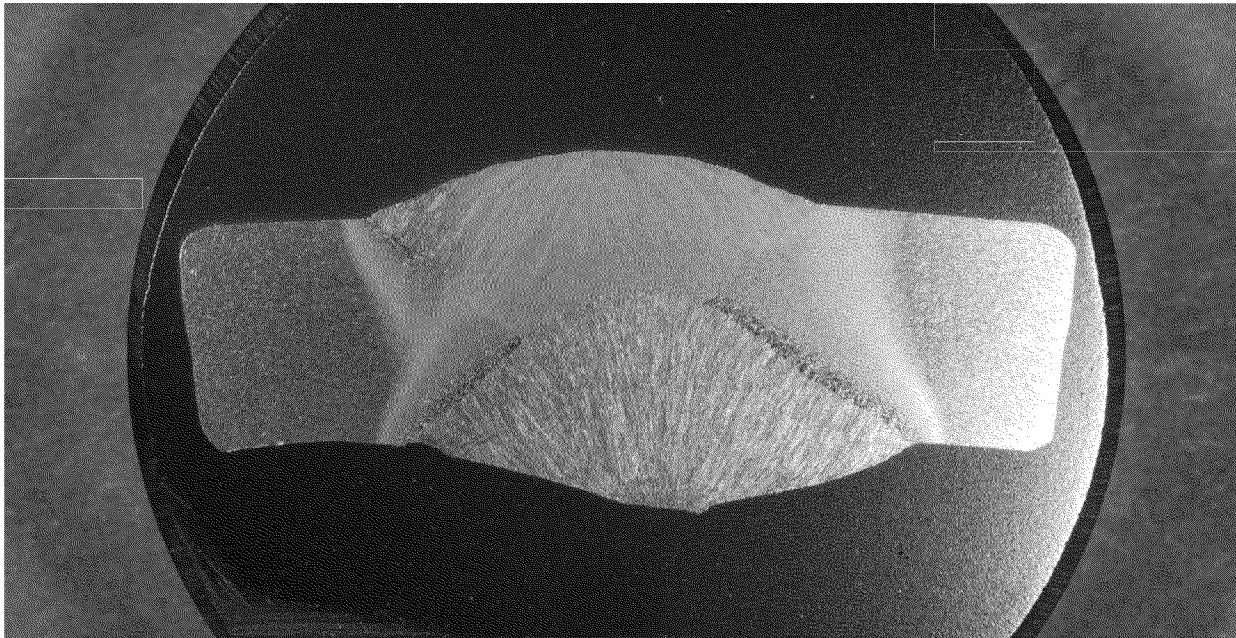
Intact Seam Showing Normal Seam Weld Deposition
